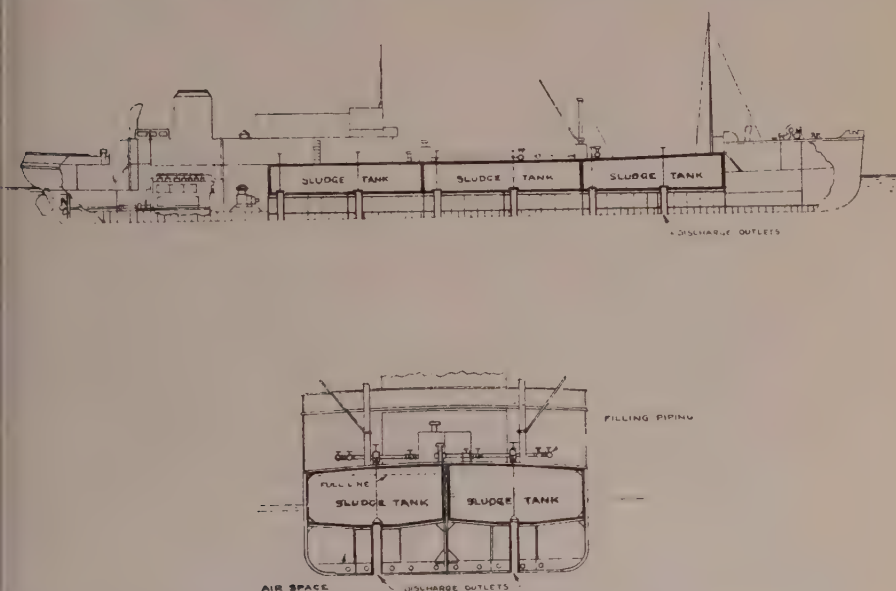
LONGITUDINAL AND CROSS SECTIONS OF SLUDGE VESSEL, SHOWING SLUDGE TANKS AND DISCHARGE OUTLETS
